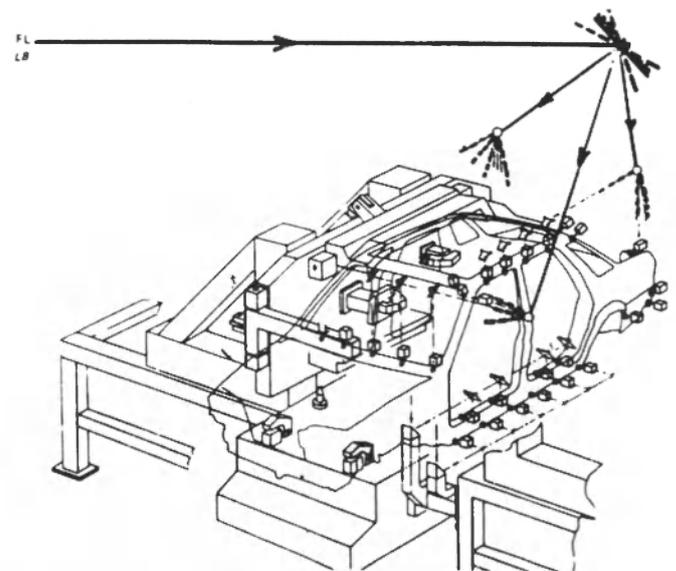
Assembly line with one laser source supplying several welding heads
